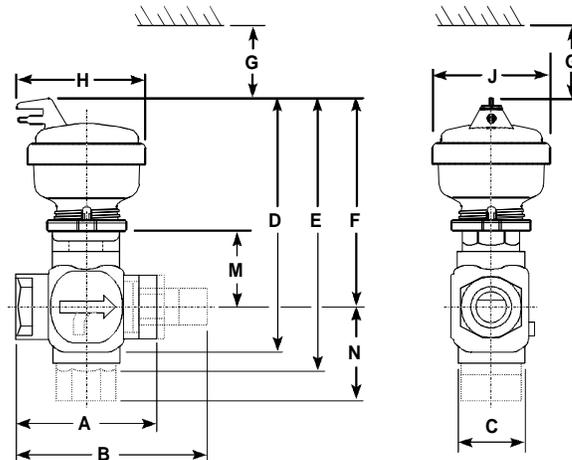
VT Series Valve with V-4000-1 (41) Pneumatic Actuator ①
